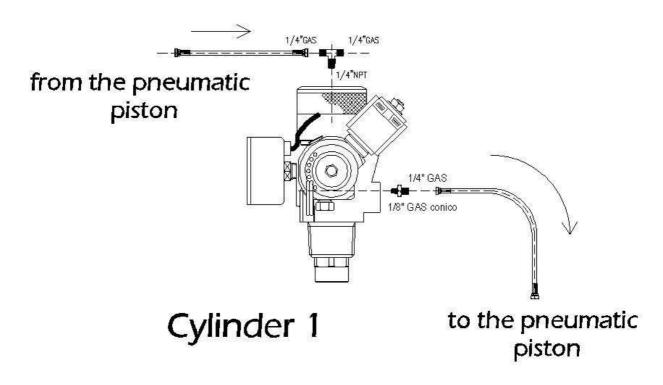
Pneumatic connection of piston outlet (Enclosure A) to the pneumatic line on the cylinder rack
